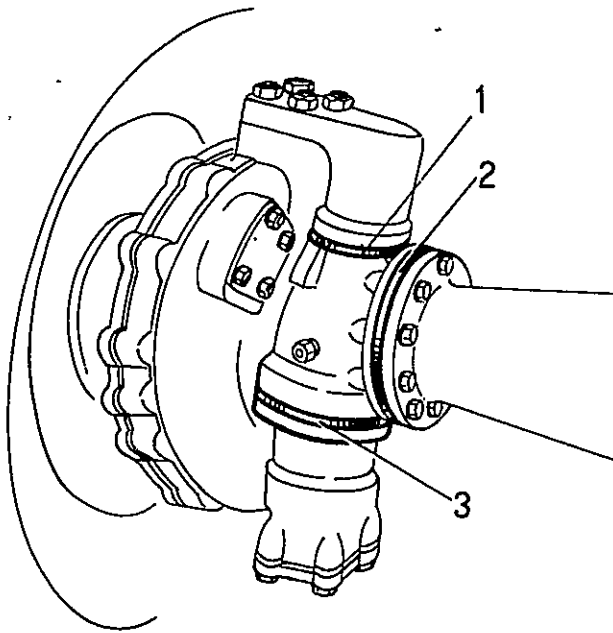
Adjustment of the backlash of the media-driving bevel gear.
